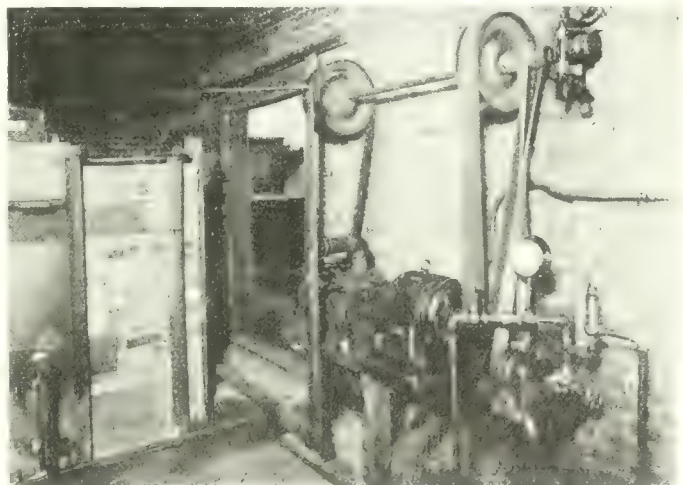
COMPACT ARRANGEMENT OF MOTOR, PRESSURE BLOWER AND OIL FUEL PUMP FOR FURNACE
